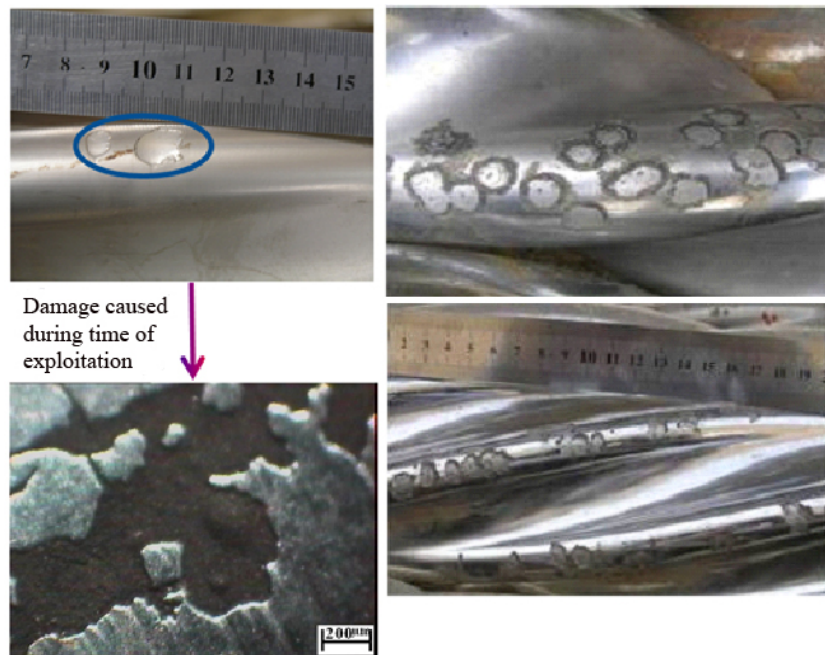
Macro and micrographs of the surface damage on rotor including avulsion and holes.
